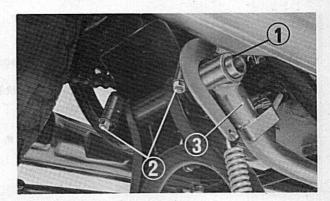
(1) Main stand pivot pipe (2) Lock bolt
